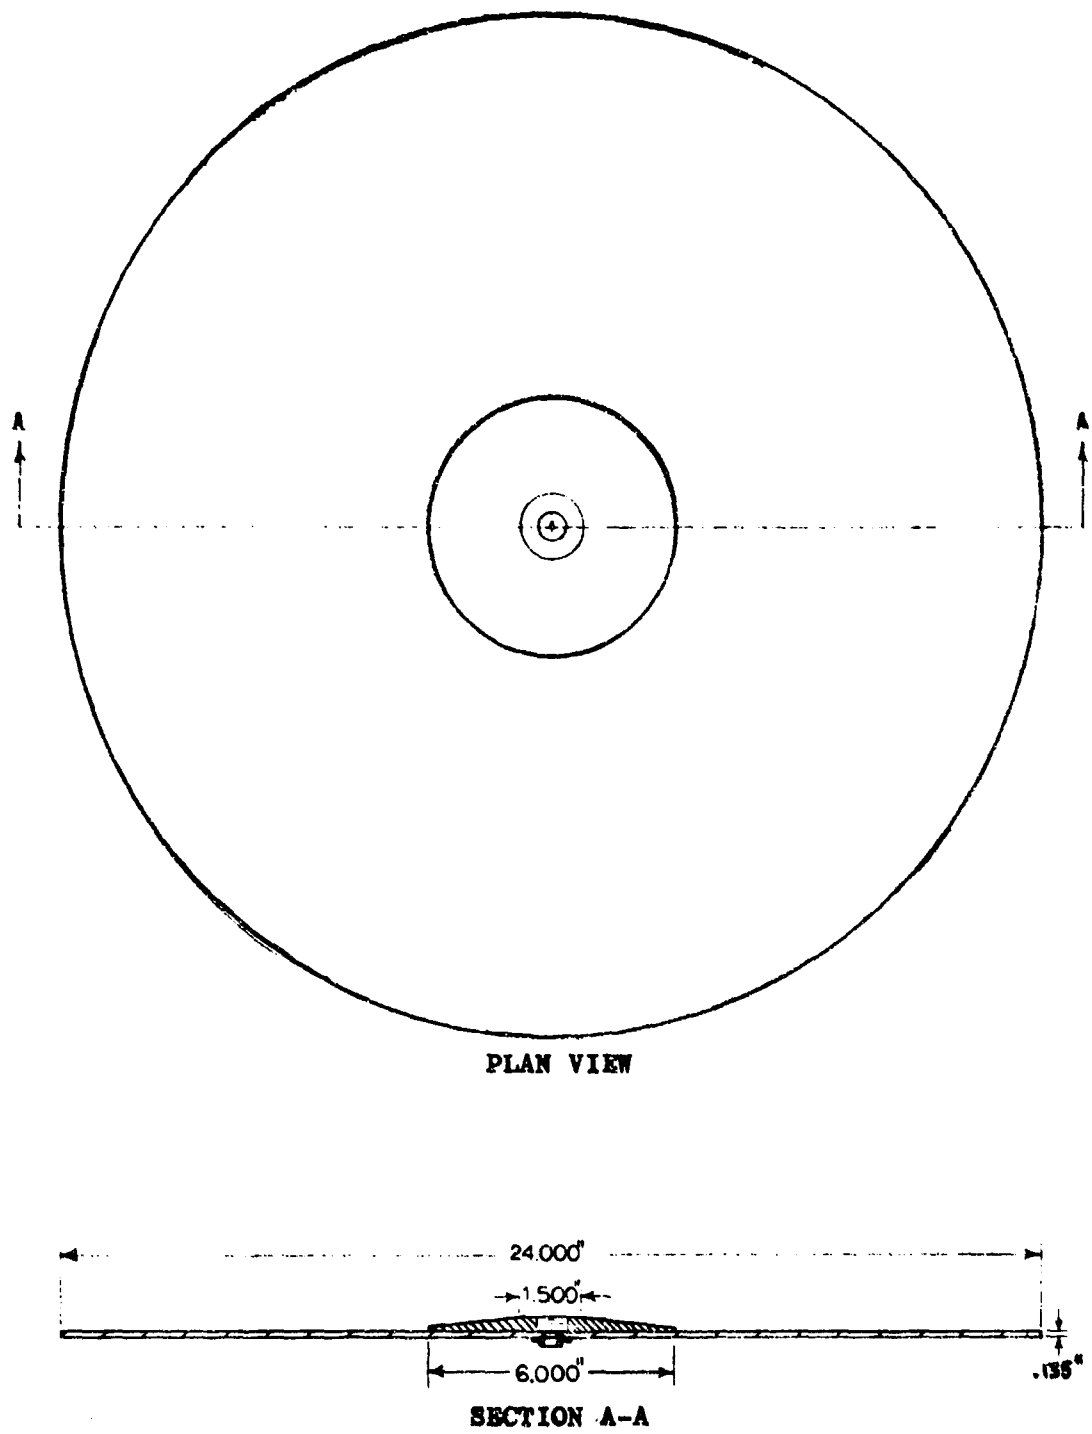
WORKING DRAWING OF DEFORMATION PLATE
